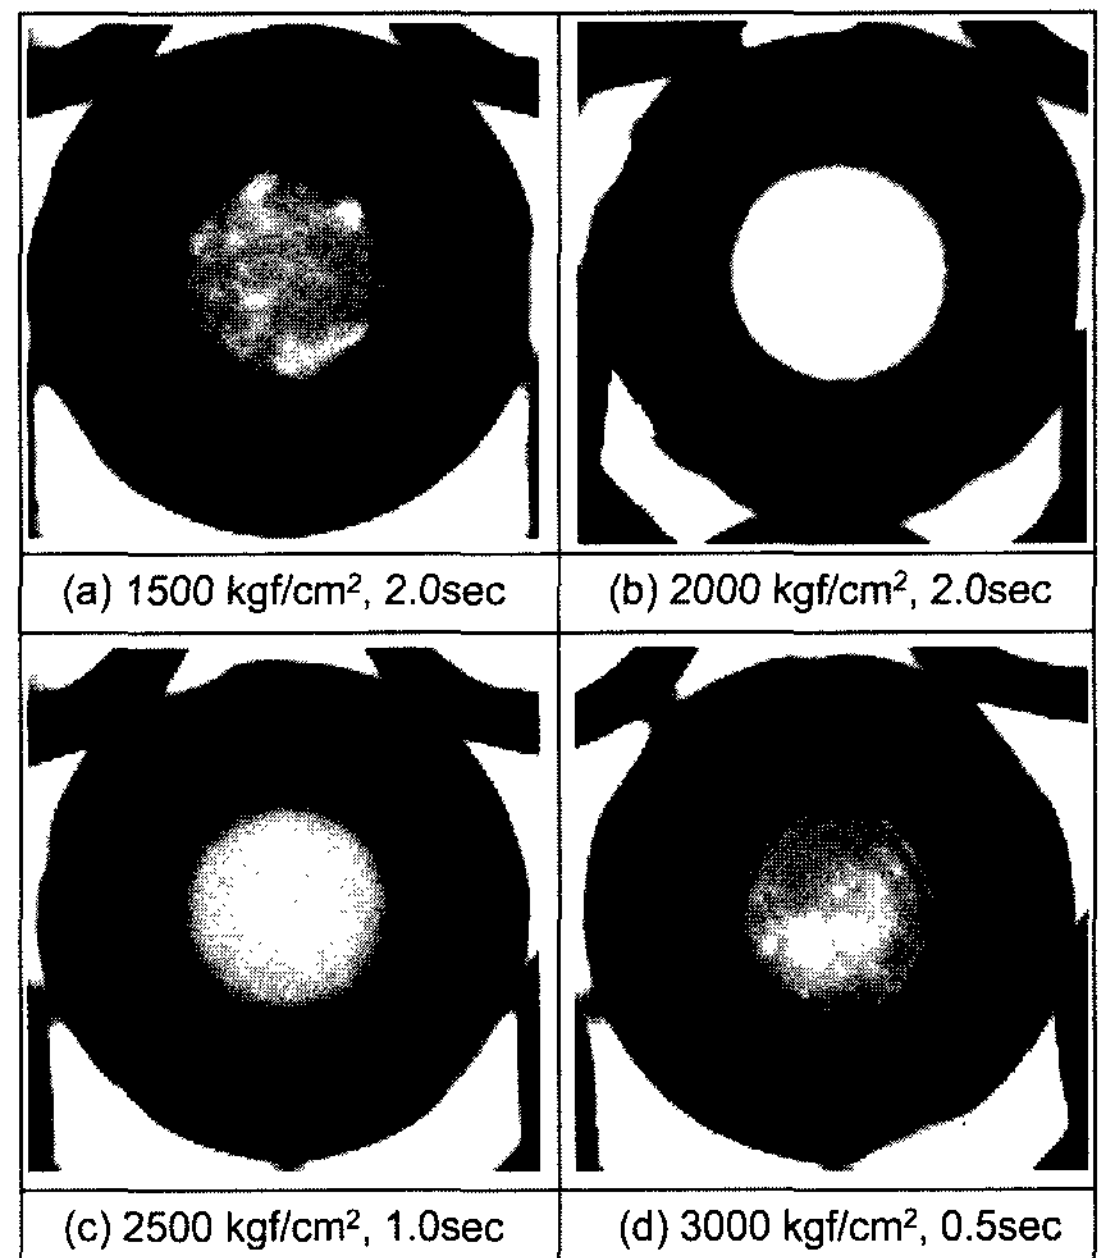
X-ray radiograph showing internal casting defects at different squeeze pressures and squeeze time-lags:
